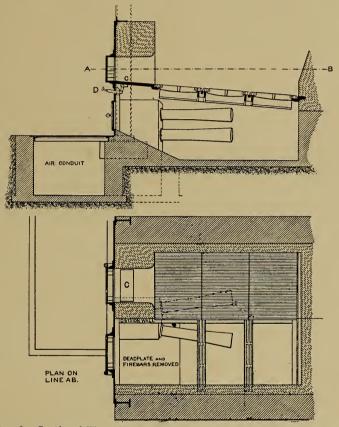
Sectional Elevation and Sectional Plan of Meldrum's Silent Blower.
